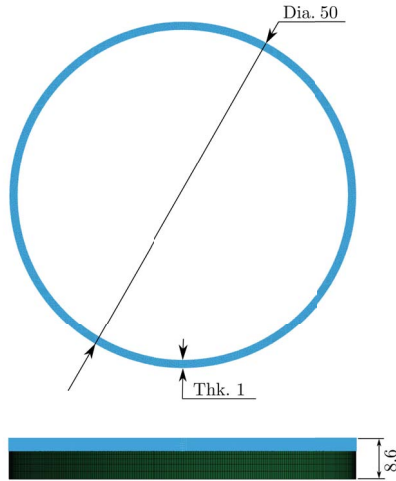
Geometry of the workpiece (all dimensions above are in mm).
